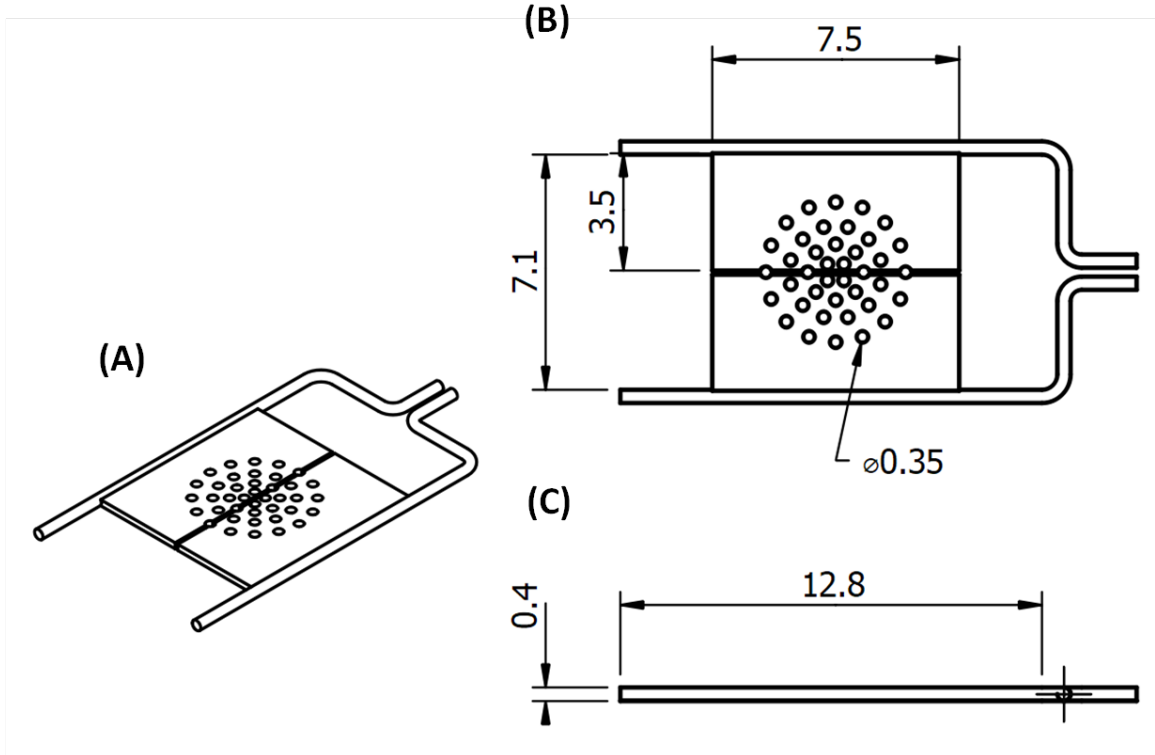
Base Module hinged grate, component-*h* and *i*. (A) isometric view, (B) top view, and (C) side view.
